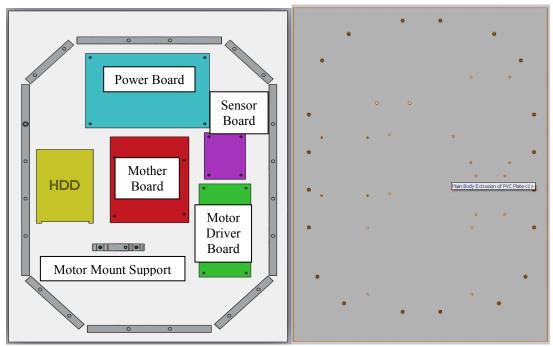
Side-paneling and electrical mountings to PVC plate (left). Specific mounting holes to PVC (right).
